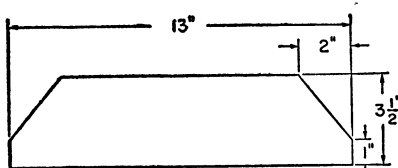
Valve lifter guide installing plate for 281 and larger six-cylinder engines
